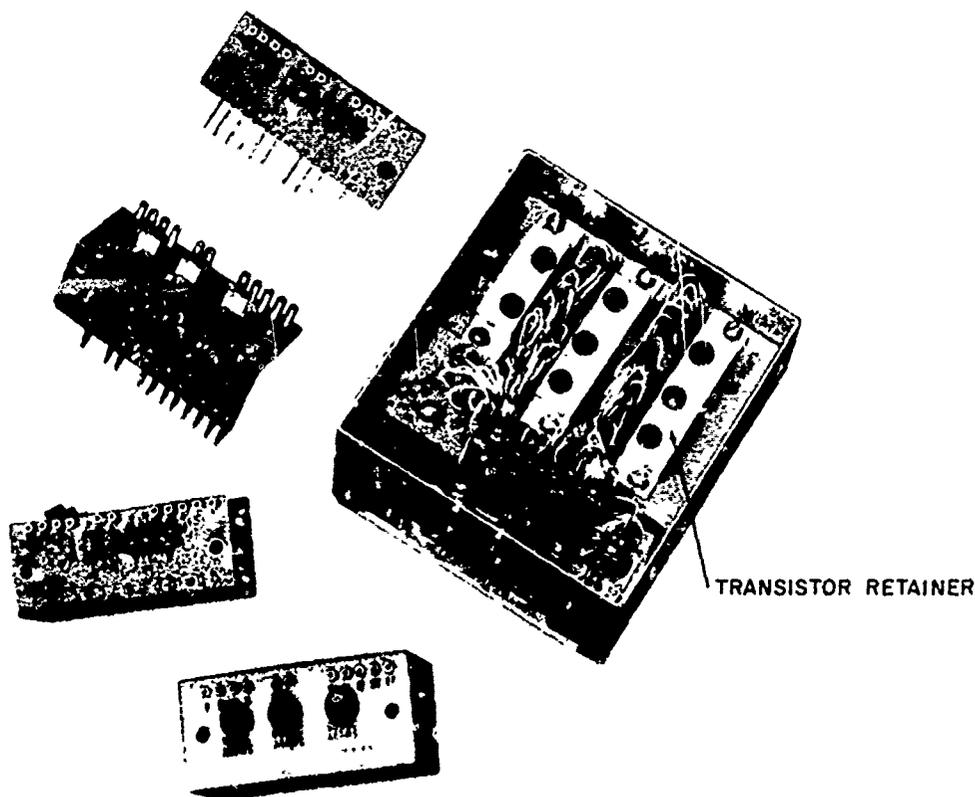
Printed Wiring Boards Formed into Potted Modules
